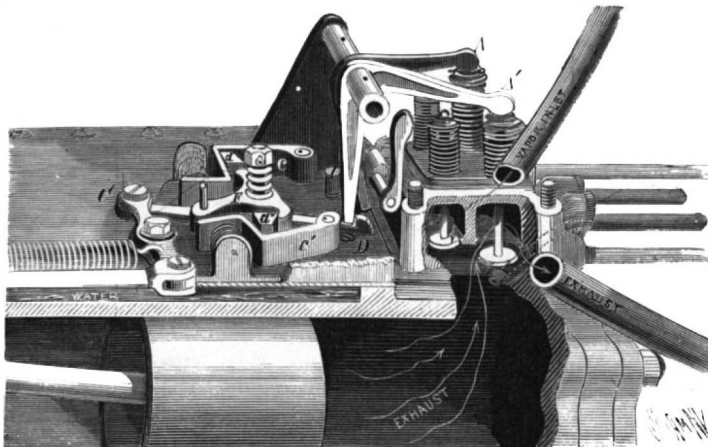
VALVE MOTION OF MOTOR CYCLE.
